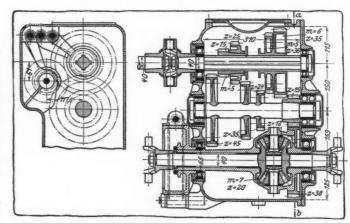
Gearbox of 4-wheel-drive army car; figure to the left is section on the line ab
